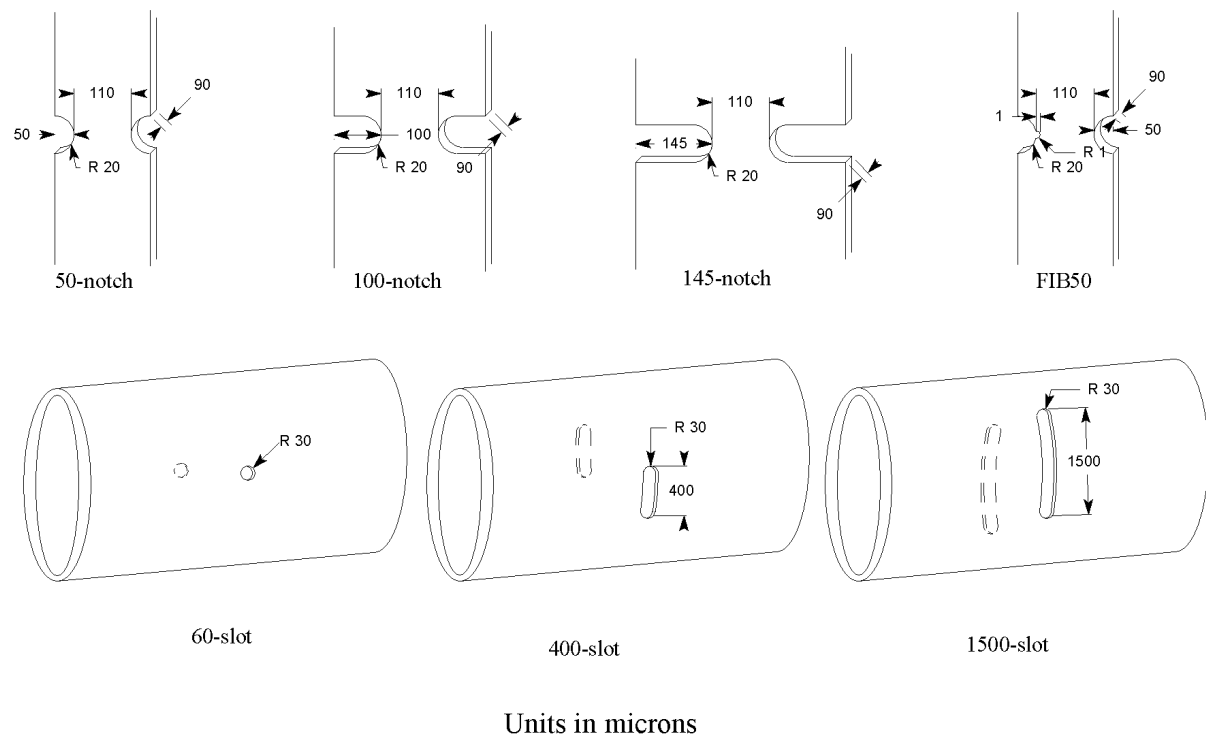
Geometry of the microscopic 316L stainless steel specimens.
